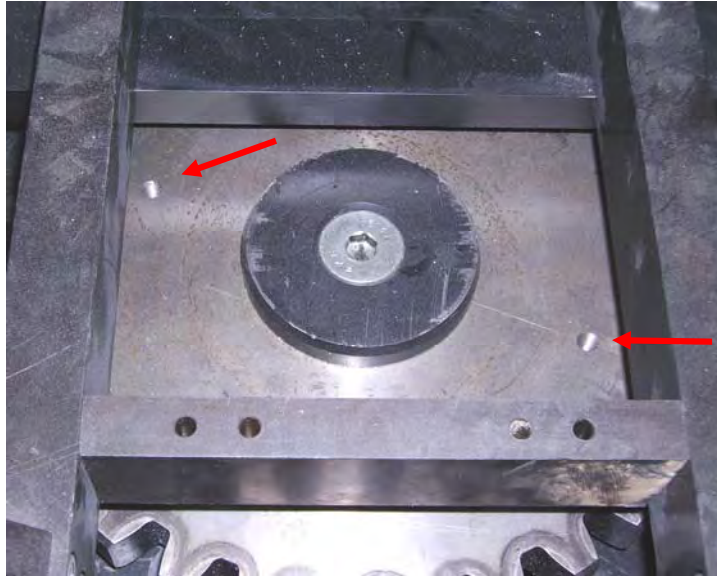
Gearbox Drive Gear Eye Bolt Fixing Holes (Fixture Still in Position)
